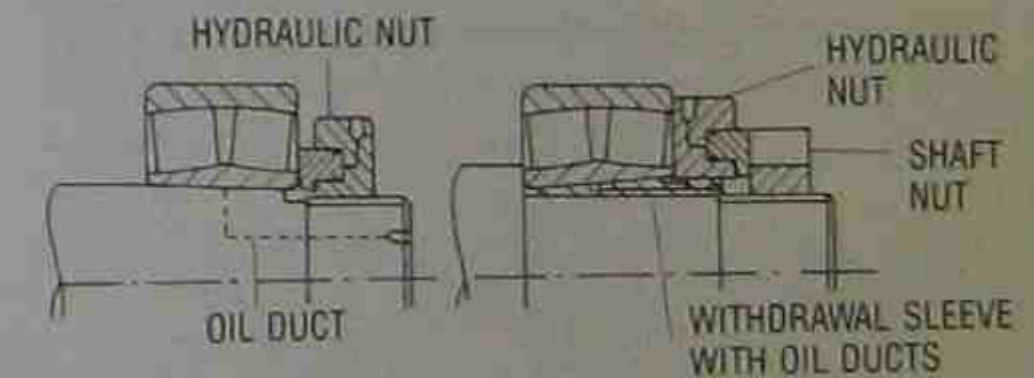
Using oil injection in conjunction with a hydraulic nut.
